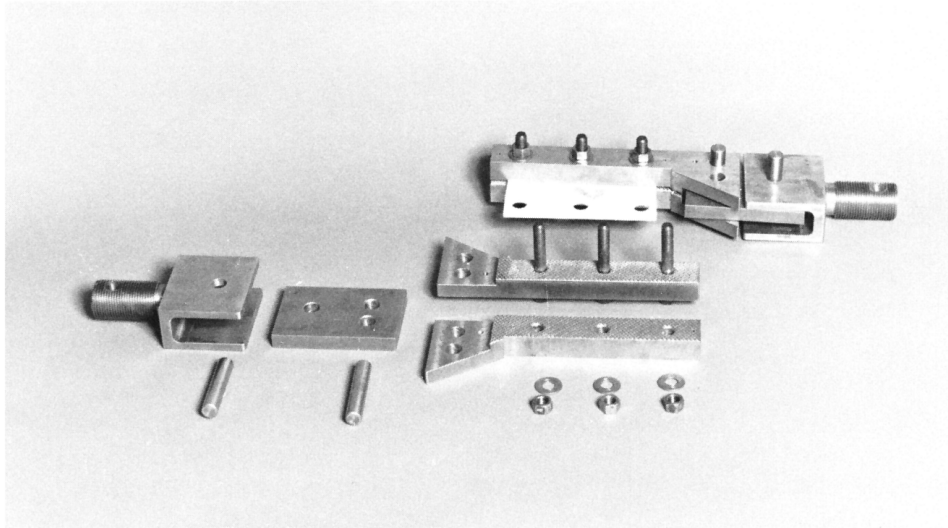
Procedure A Partially Assembled Typical Test Fixture
